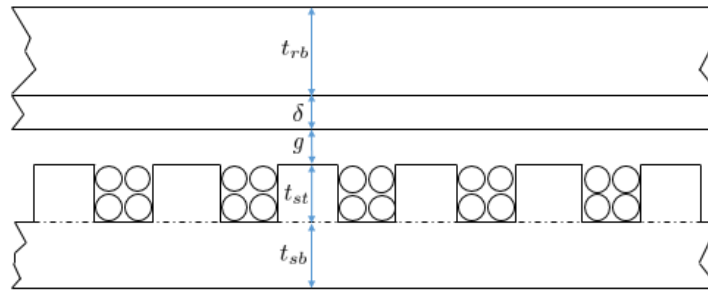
Cross-section of the radial flux induction machine showing its geometric variable definitions.
